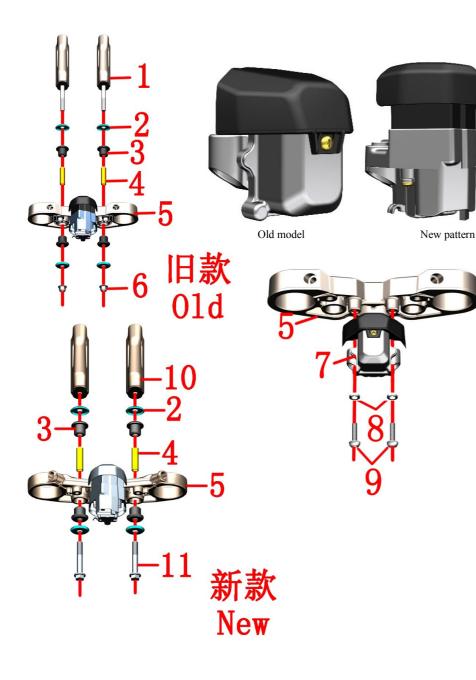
FRONT FORK COMPONENT		Uplink plate, direction handle block assembly	CHK
